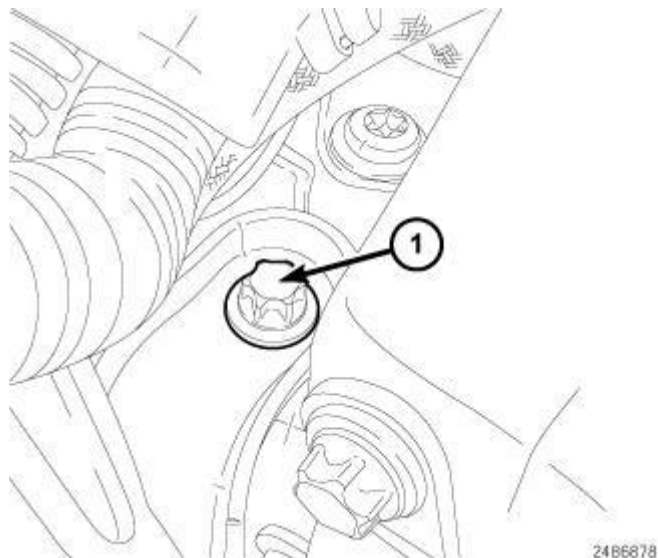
Upper Fuel Line Bracket Bolts
